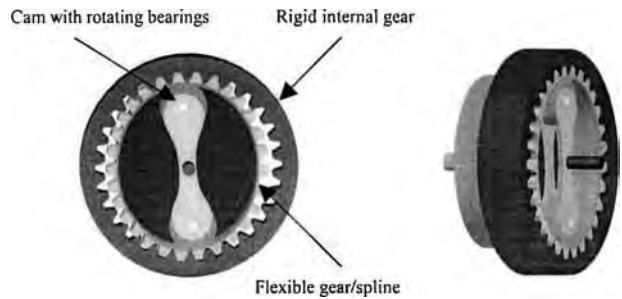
Harmonic drive mechanisms with two rotating bearings.
